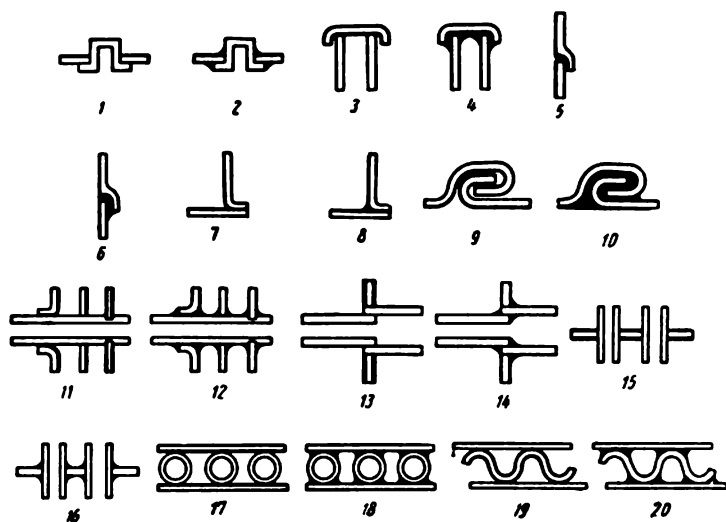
Designs of solder-clad sheets: before soldering (1, 3, 5, 7, 9, 11, 13, 15, 17, 19) after soldering (2, 4, 6, 8, 10, 12, 14, 16, 18, 20)
